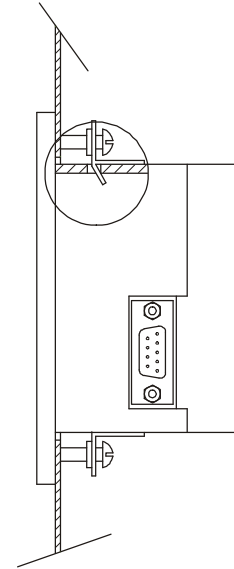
MiniOCS Mounted in Panel Box using Mounting Clips.
